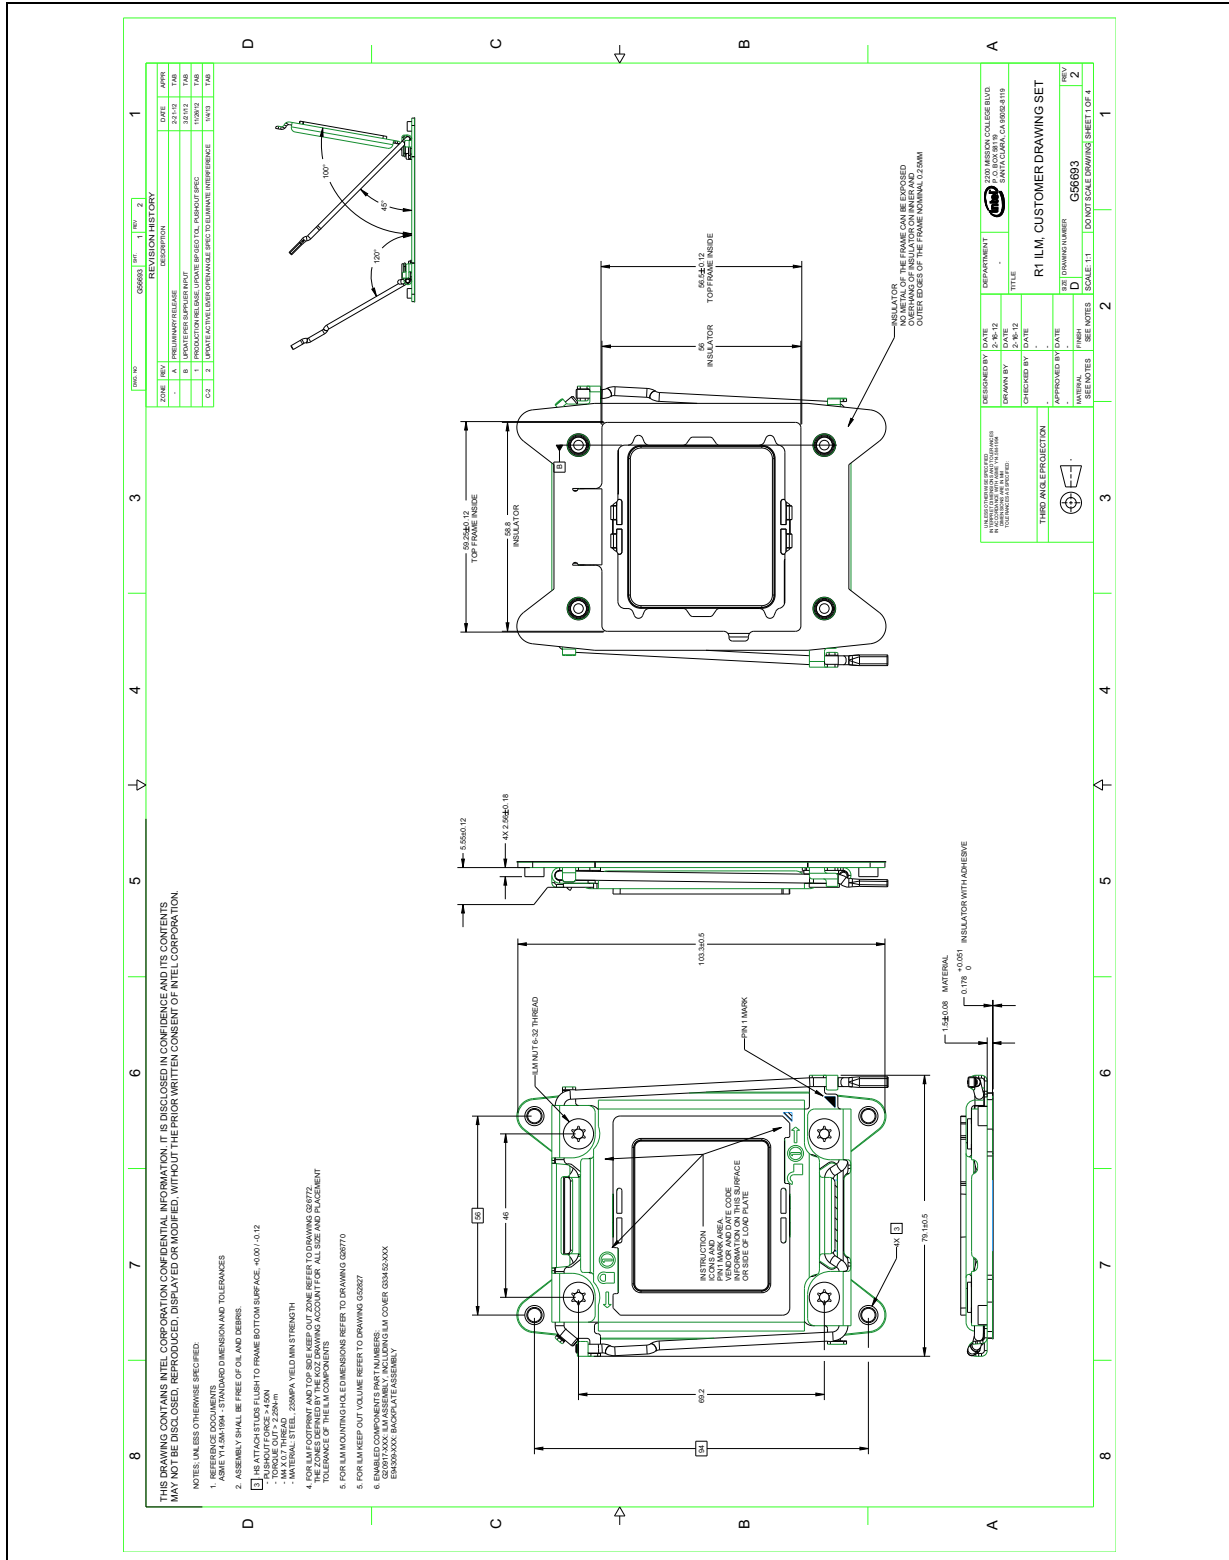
ILM Mechanical Drawing - G56693 Rev 2 (Sheet 2 of 4)
